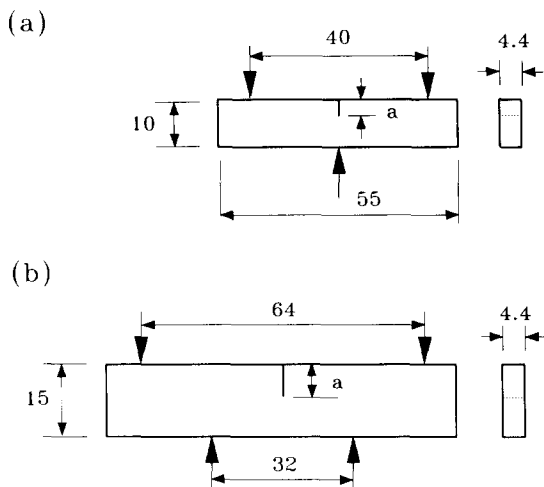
Specimen geometries for (a) Charpy impact and (b) four-point flexure fracture tests
